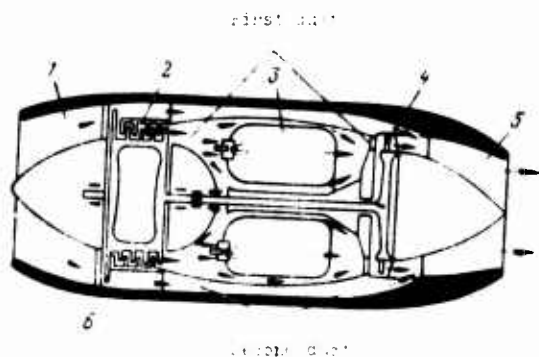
Ducted-fan TRD of A. M. Lyul'ka (1937): 1 - inlet channel; 2 - compressor; 3 - combustion chamber; 4 - turbine; 5 - nozzle; 6 - fan.
